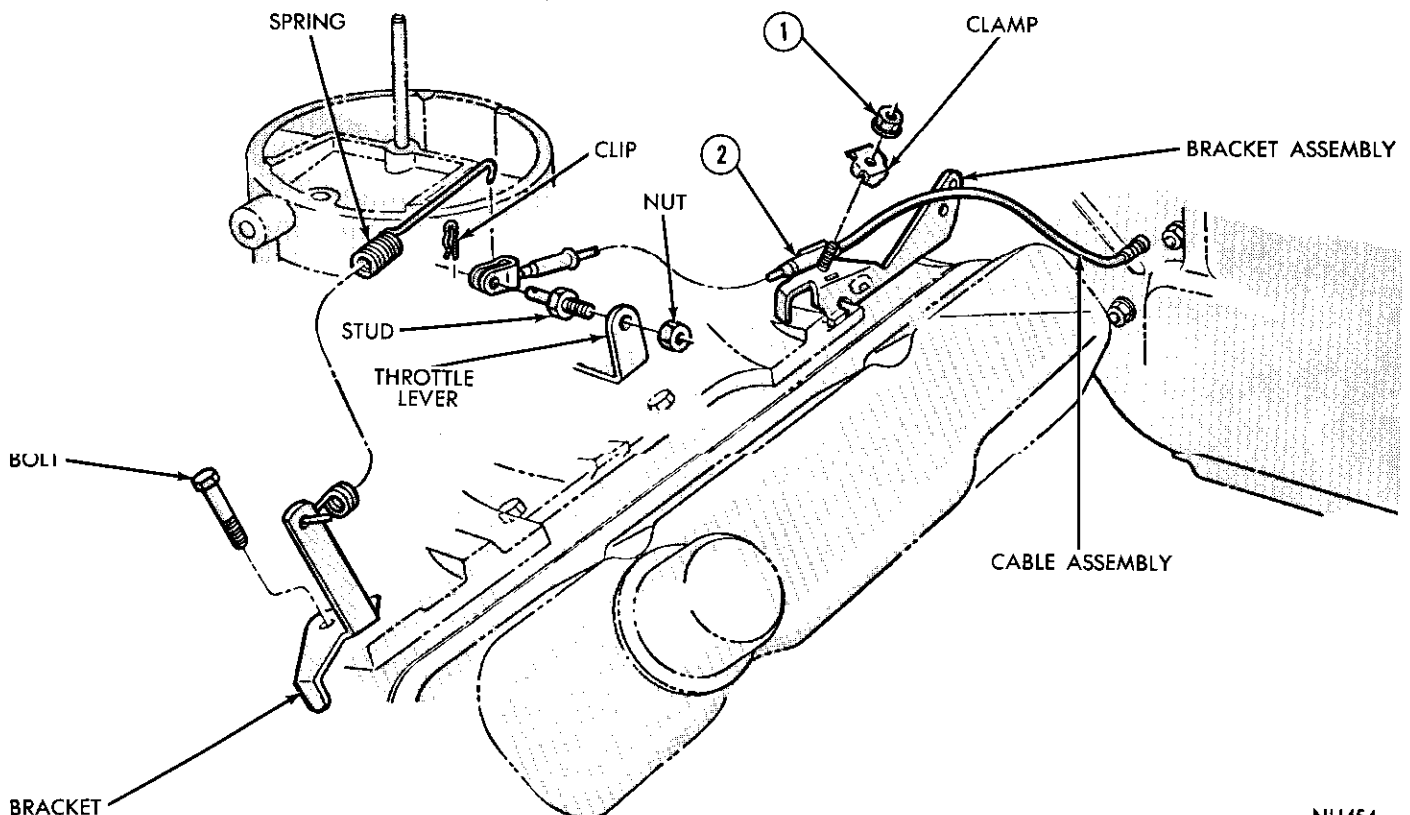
Throttle Linkage Adjustment (V8 Engines)
